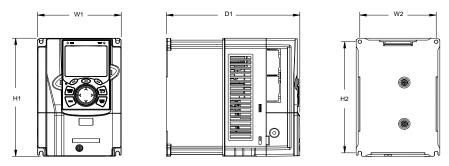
Wall installation diagram of VFDs of 220V 0.75–15kW and 460V 1.5–30kW
